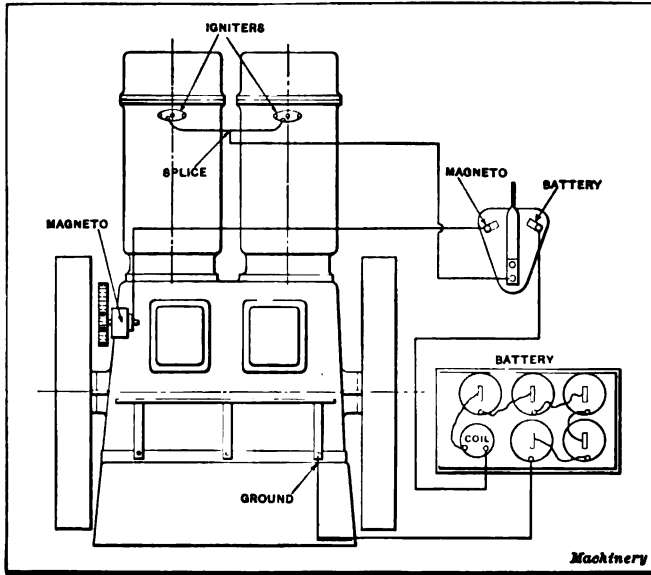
Wiring for Two-cylinder Vertical Engine with Batteries and Gear-driven Magneto
